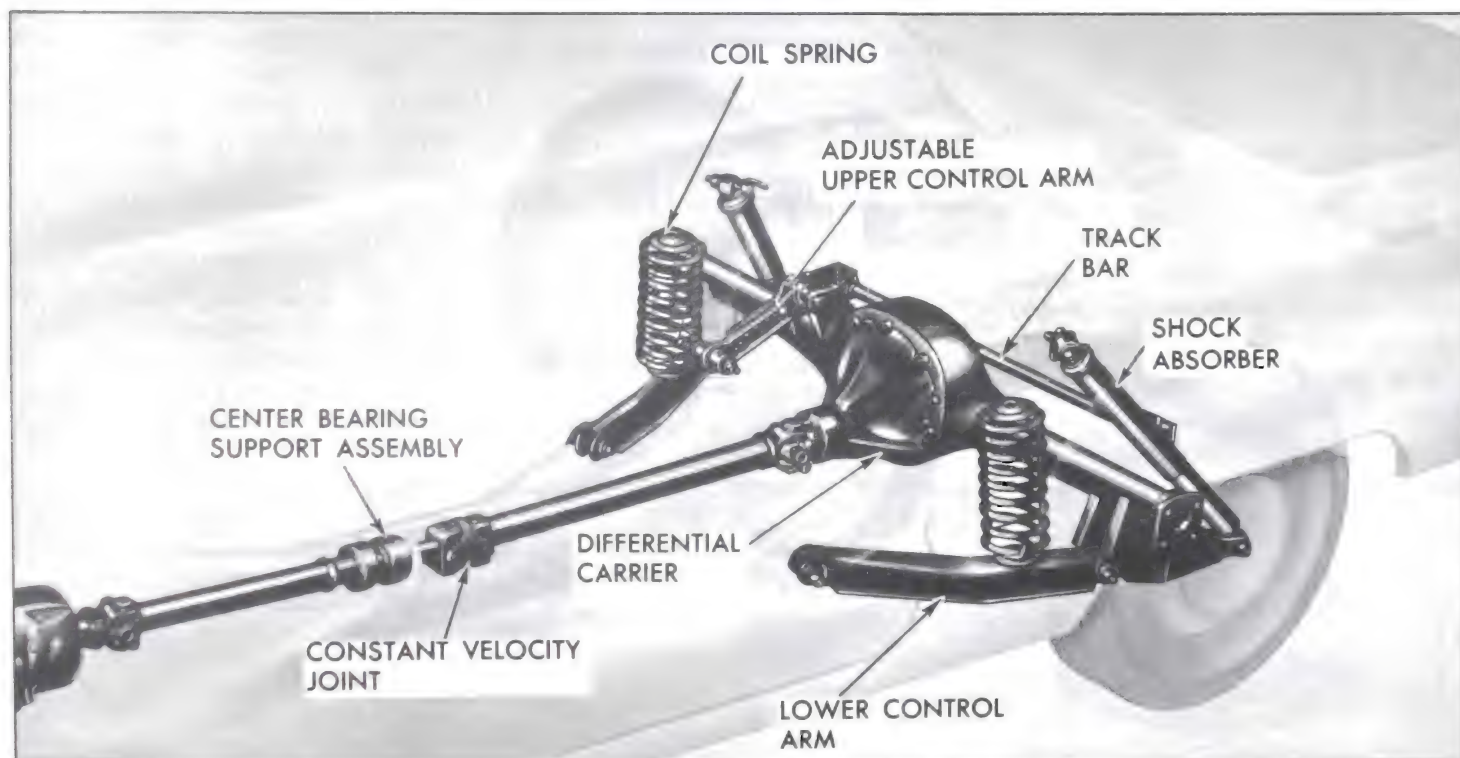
Propeller Shaft and Rear Axle Assemblies—4400-4600-4800 Series
